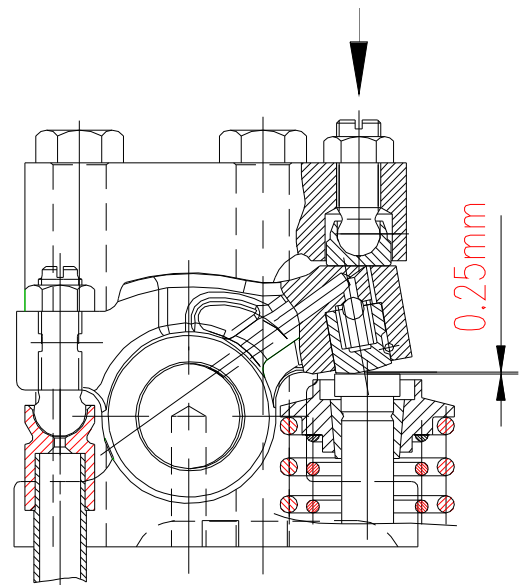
Valve gap of 0.25mm at exhaust valve end in cold state
